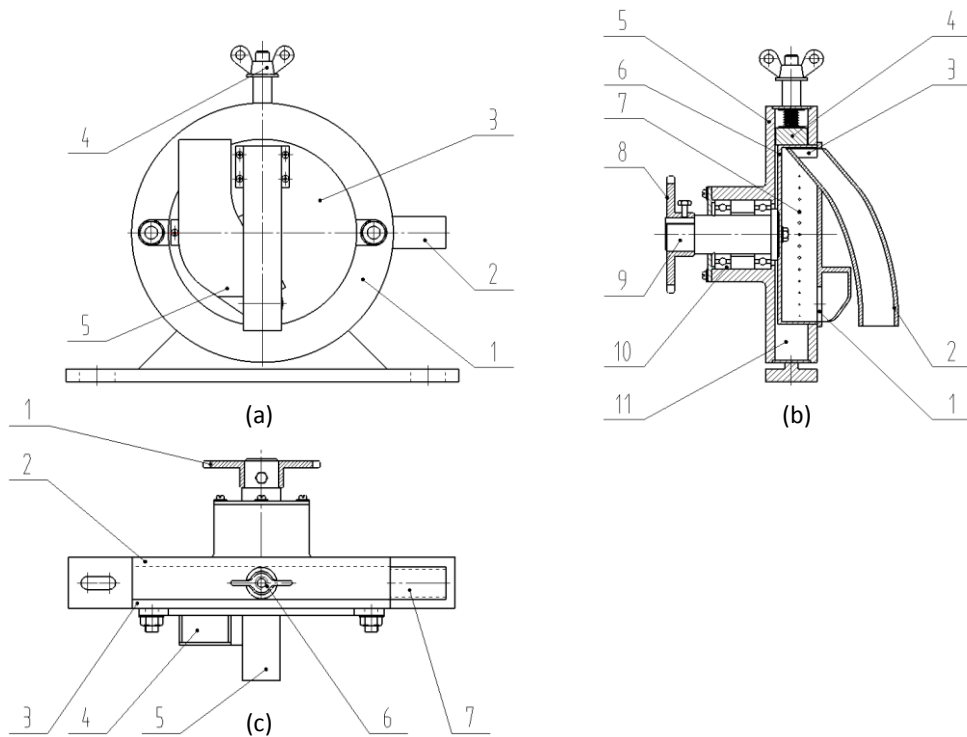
Schematic diagram of the pneumatic metering device with hooked seed tube
